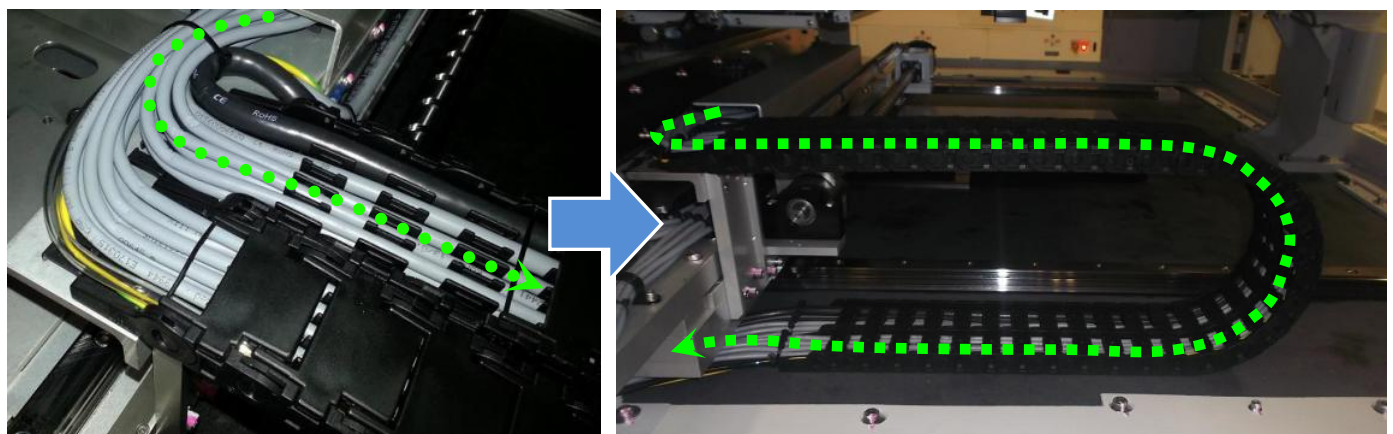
Stepper Motor Cable (Y axis Wide E-Chain)
